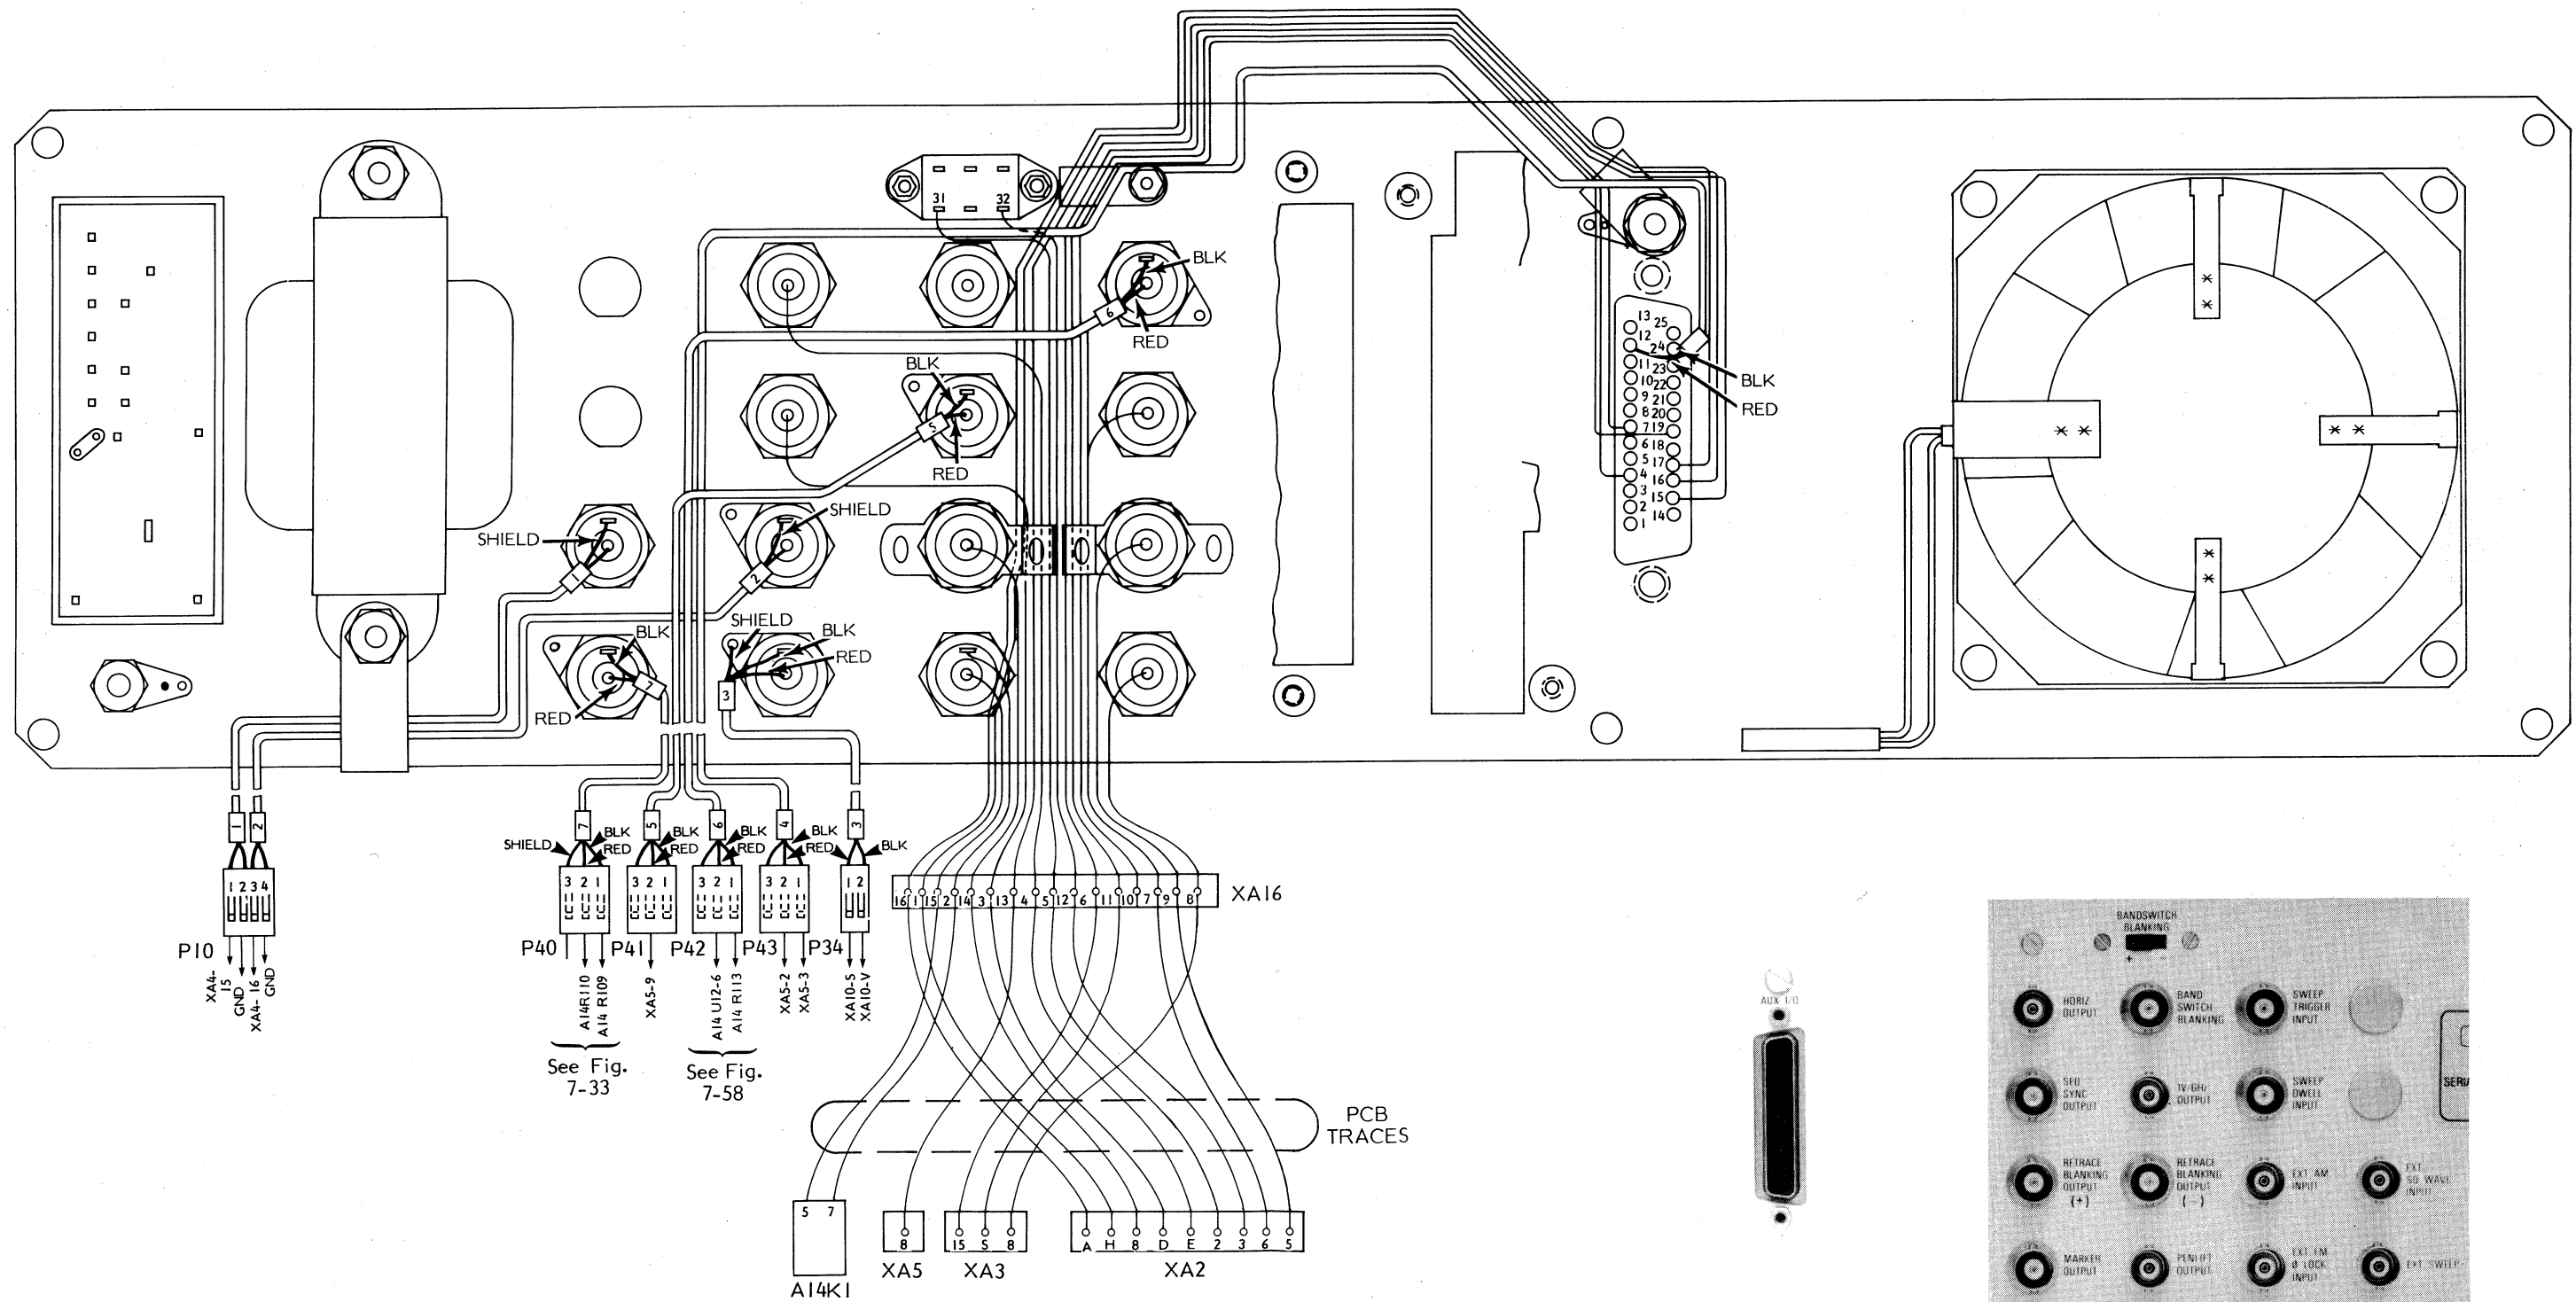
A. Rear Panel Wiring (Sheet 1 of 2)
